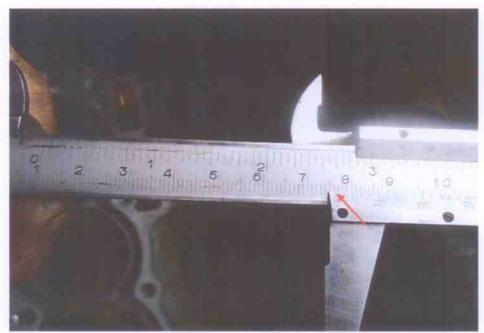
shows the stroke measurement of cylinder 1, which was recorded to be 76.10mm.
